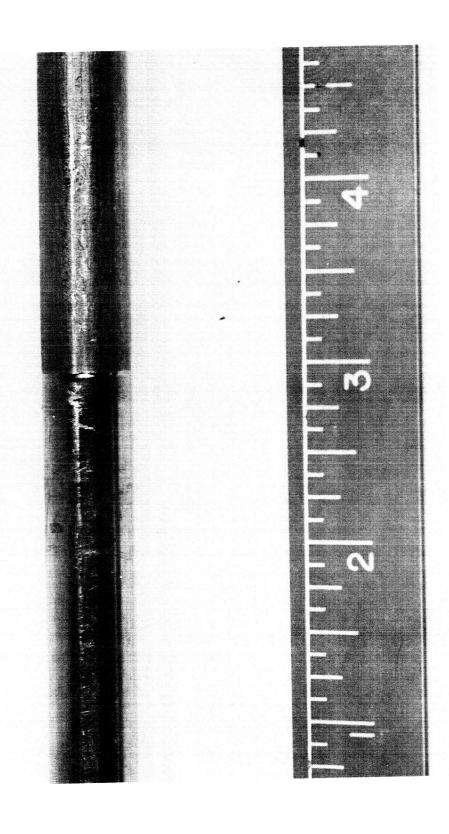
Weld Between T-111 Grucible and Cb-12r Collector Tube (View Normal to Axis).
